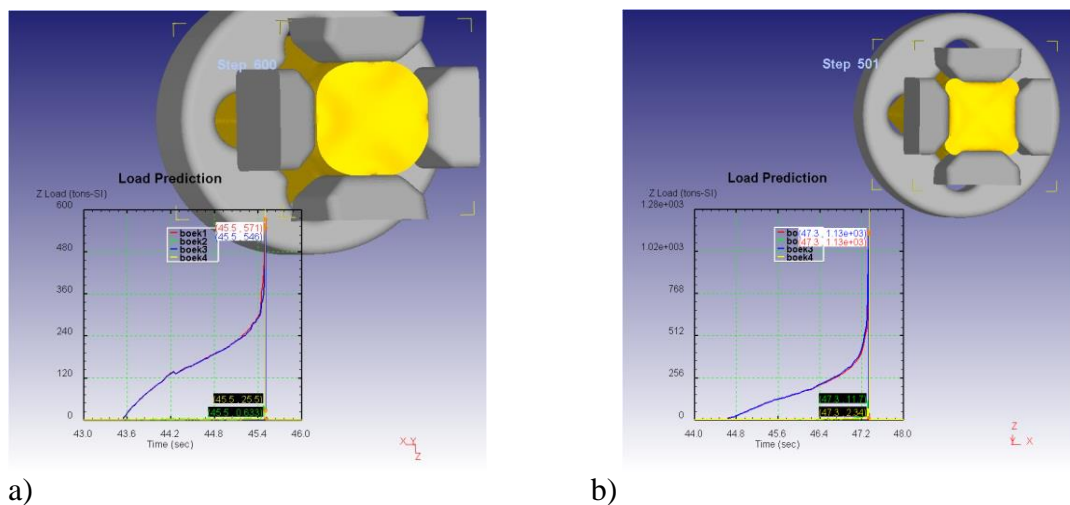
Ingot forging in FDFD according to Technique No. 1.
